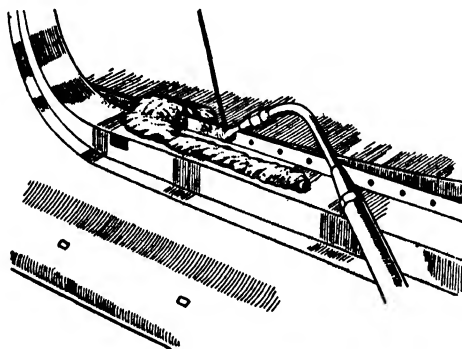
HOW TO RE-MAKE SPOT-WELDS
